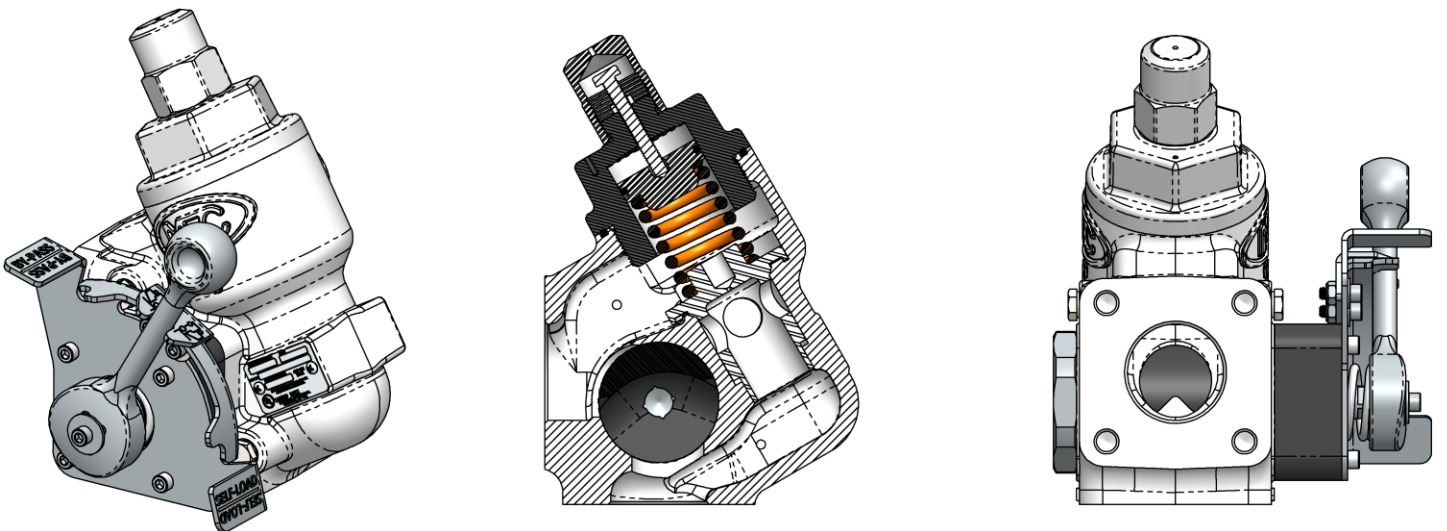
Cylinder Filling Mode, Right hand configuration shown
